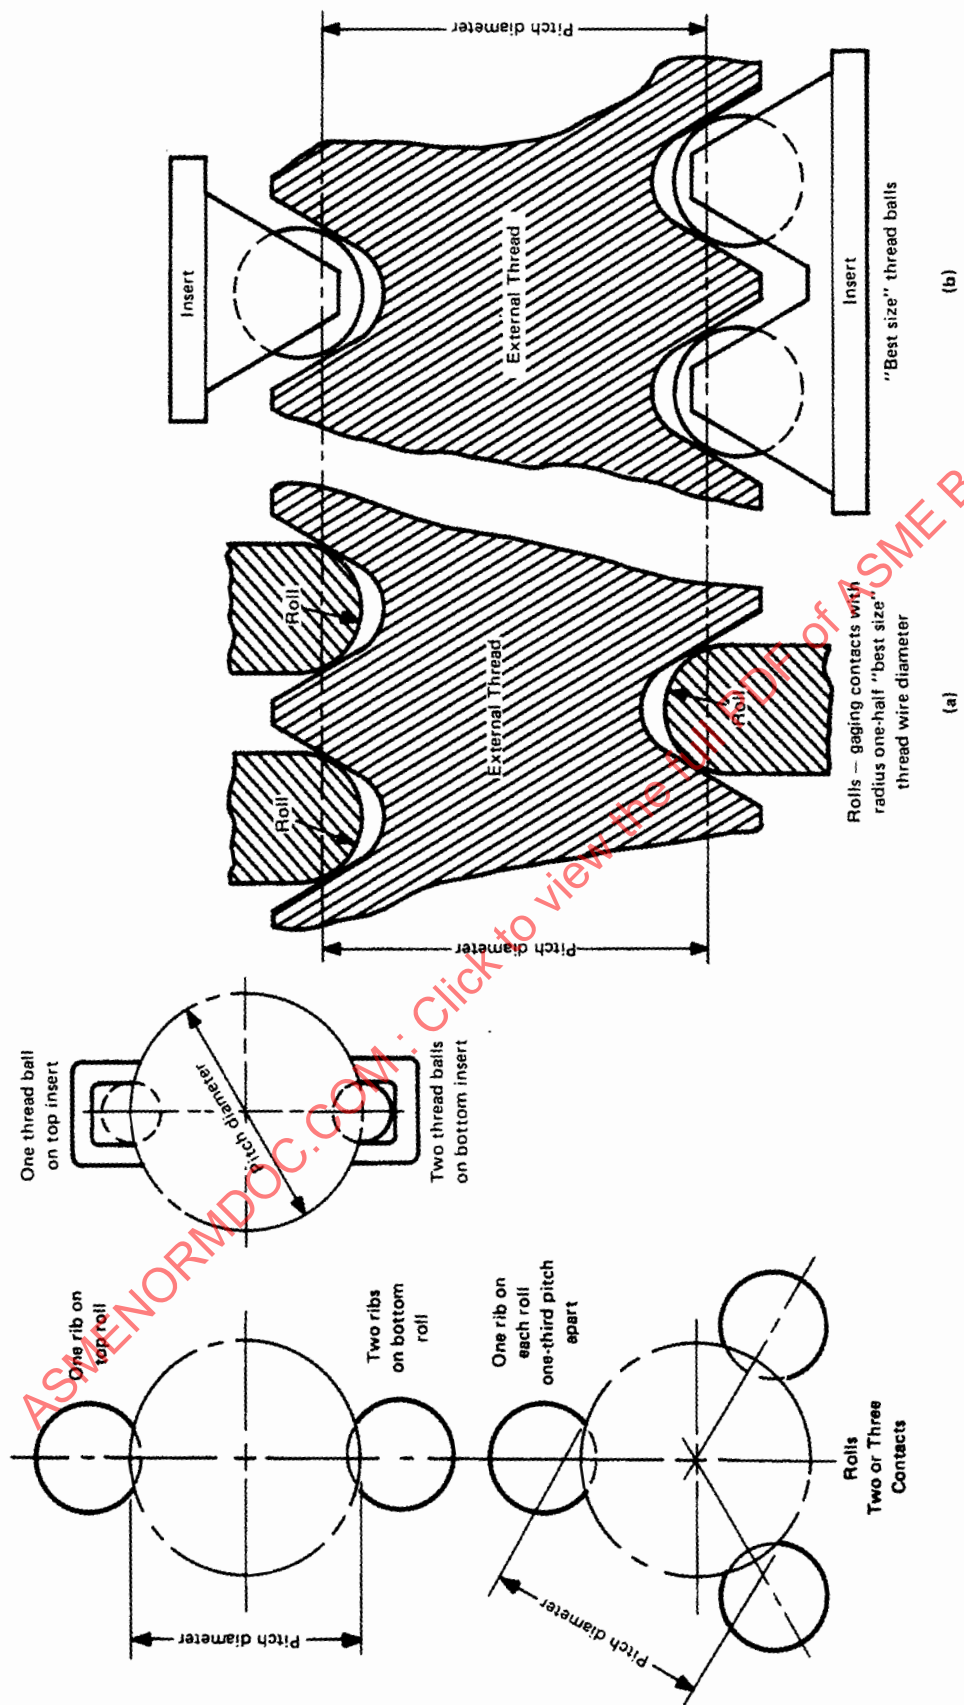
INDICATING THREAD GAGES — MINIMUM-MATERIAL THREAD-GROOVE DIAMETER LIMIT AND SIZE
